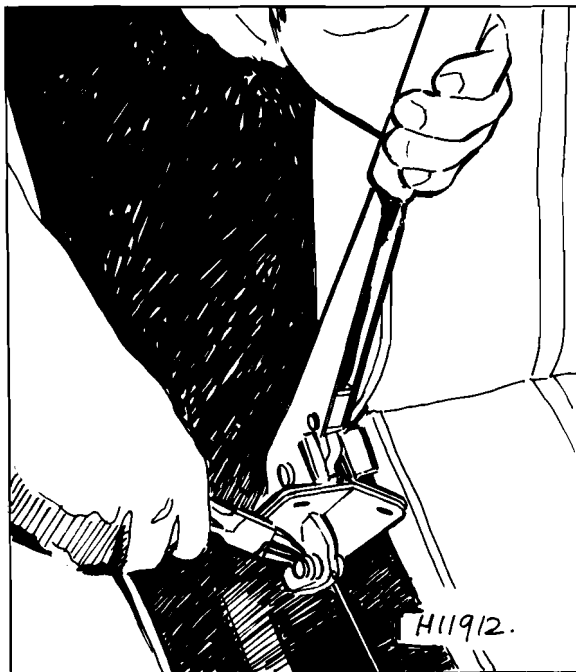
Disconnecting the cable from the handbrake control lever (Sec 18)
